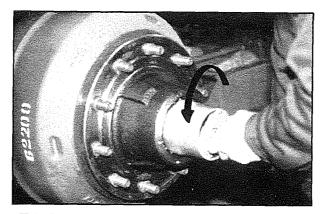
Inner spindle nut is backed off 1/2 turn for steer axles or 1/4 turn for drive and trailer axles.
